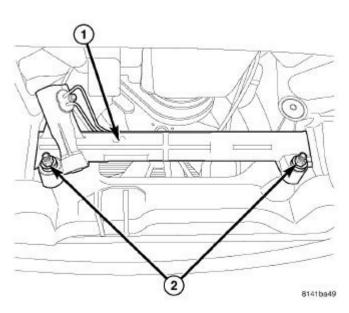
GEAR MOUNTING BOLT Courtesy of CHRYSLER LLC
